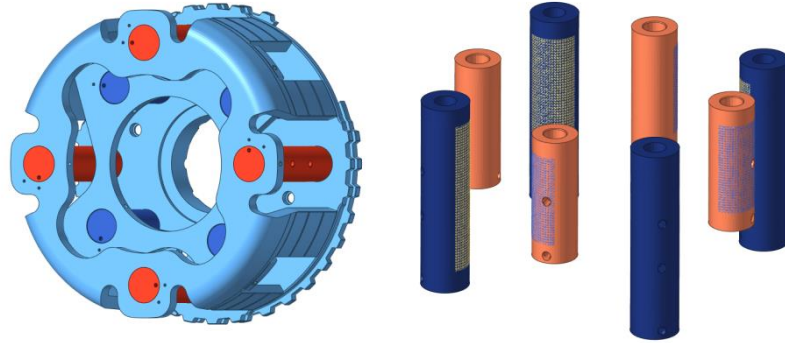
Simple model of carrier analysis and pressure surfaces of shafts
